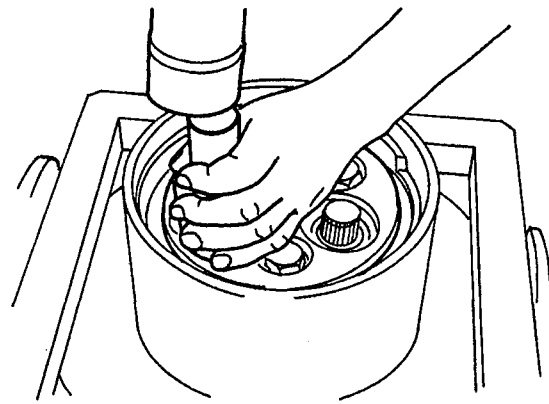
Putting the RV gear assy in spindle (2) securely
